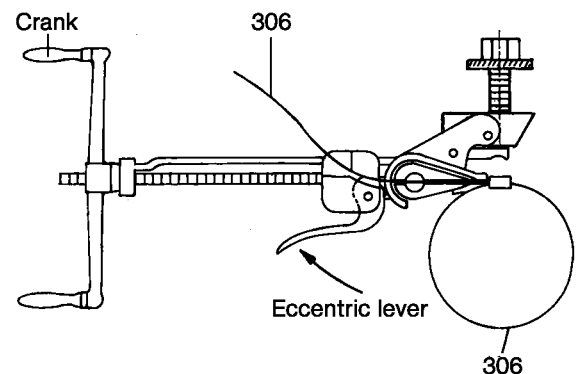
Clamping the clamping band by means of clamping tool Band-It and adapter J050.
